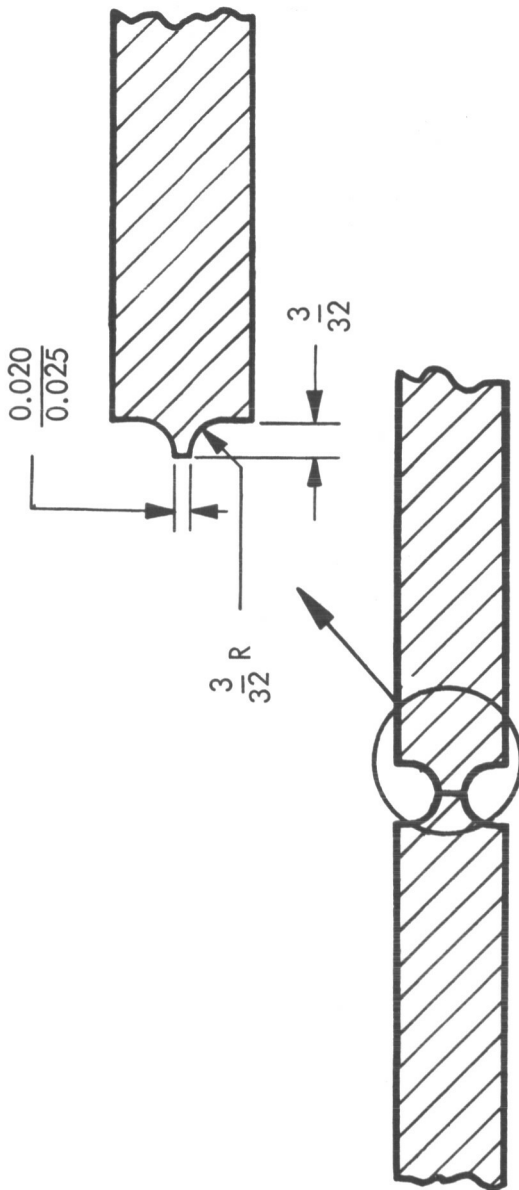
Plate Butt Weld Joint Designs and Typical Macrosections
